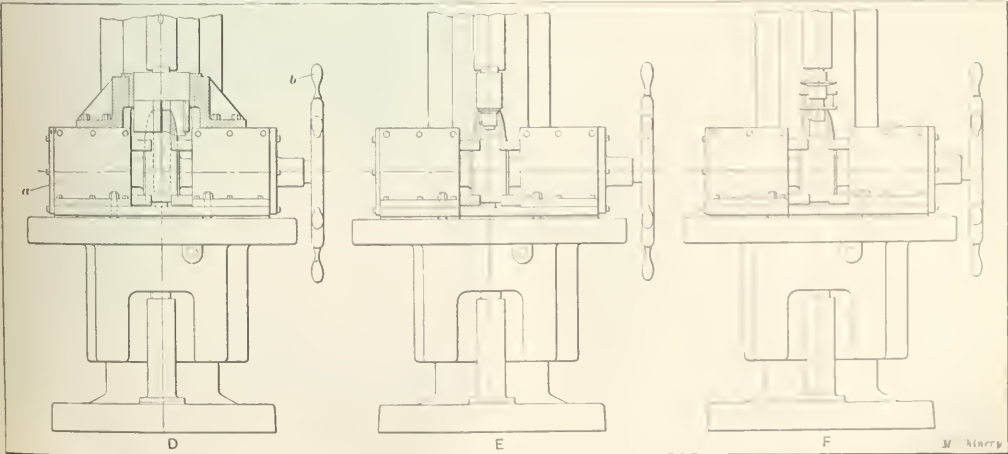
Turning, recessing and tapping High-explosive Shells on a High-power Drilling Machine
